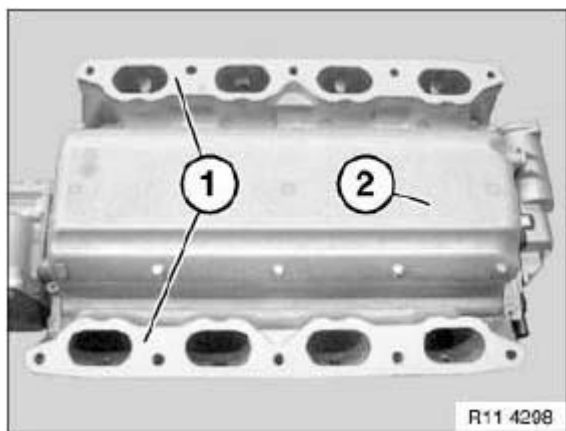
Identifying Sealing Faces On Intake Air Manifold
